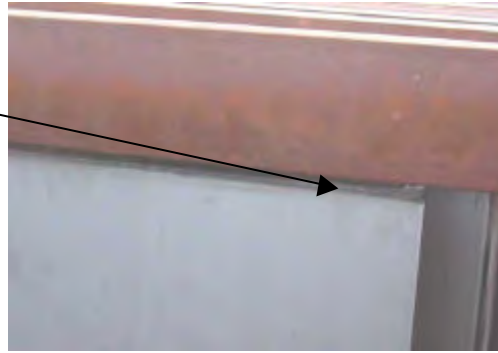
Corrosion of brazed joint between solid Cu bar and stainless steel plate
